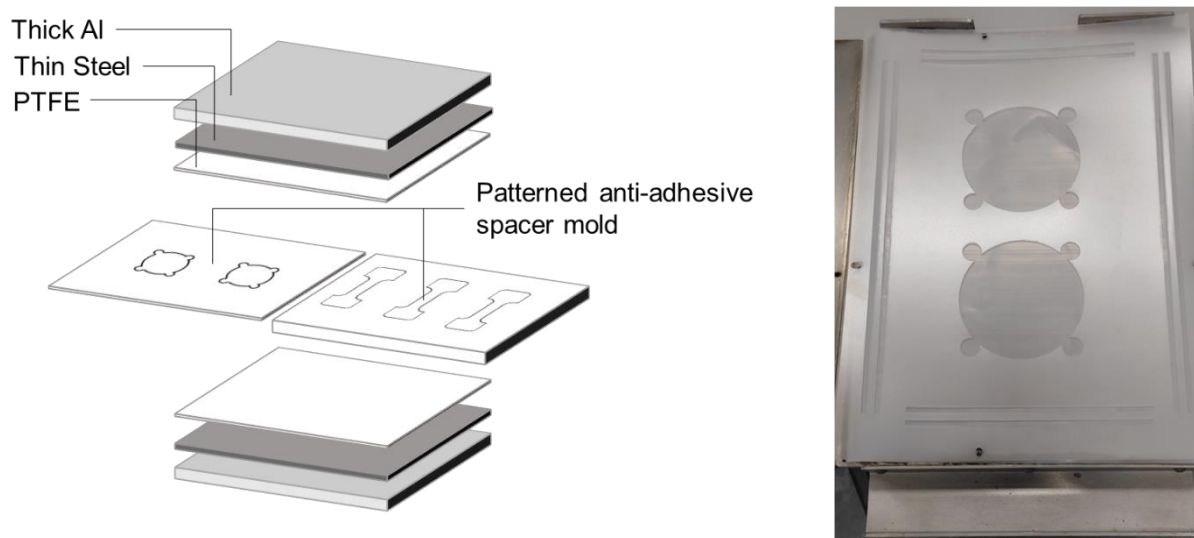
Left) Complete press setup showing the stacking of the pressing vessel (Al + Steel) and the sacrificial mold (top/bottom PTFE + patterned spacer). Right) Actual picture of a stack up from bottom up to the spacer.
